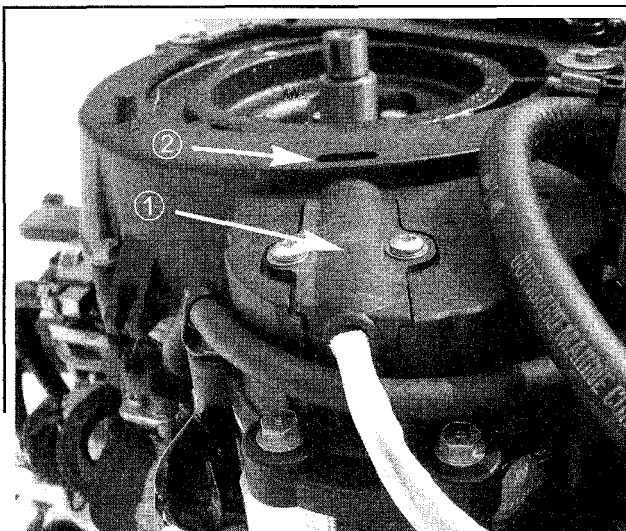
The crankshaft position sensor (1) air gap is checked using a feeler gauge inserted through the slot (2) provided in the flywheel cover
